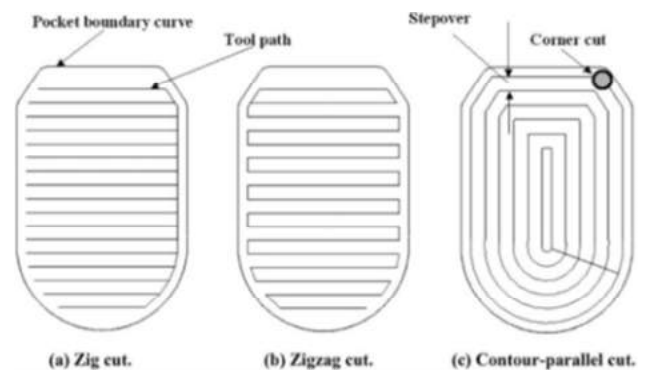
Three commonly used tool path patterns. (a) Zig cut; (b) zig-zag cut; and (c) contour-parallel cut [4]
